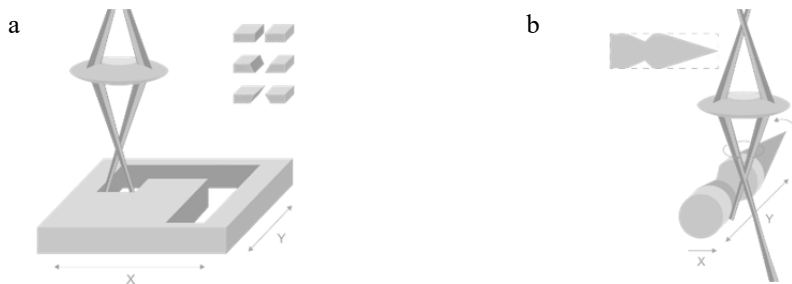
(a) Precision cutting by turning tilted laser beam and moving workpiece (schematic); (b) Laser turning by rotating and tilting beam as well as linear moving and rotating workpiece (schematic)
